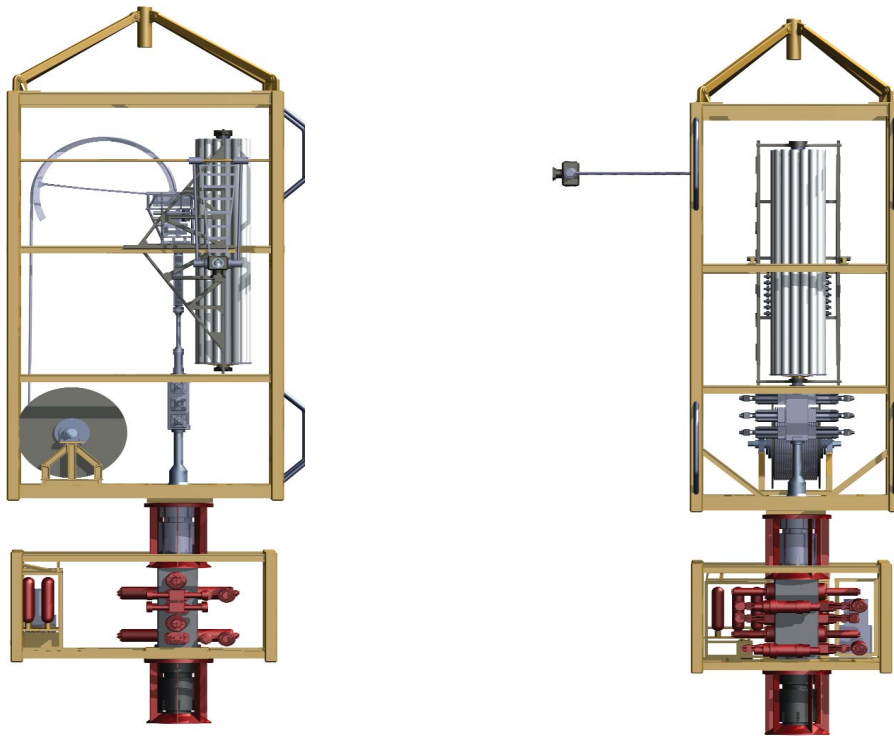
The SIM tool contains the upper CT unit and the lower BOP module.
